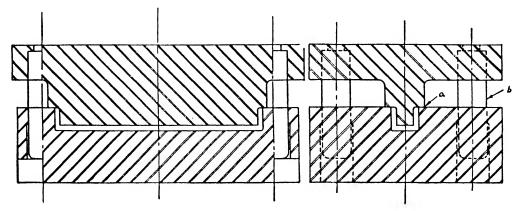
Flash type mold: a, horizontal cutoff; b, guide pin.
